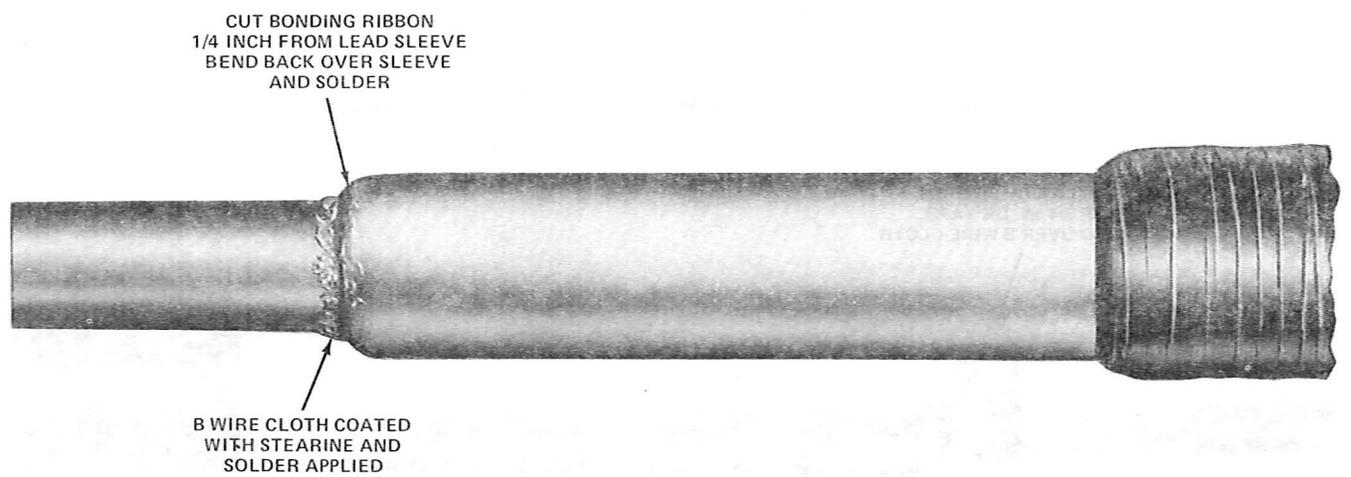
Auxiliary Sleeve Beat-In and Solder Applied
